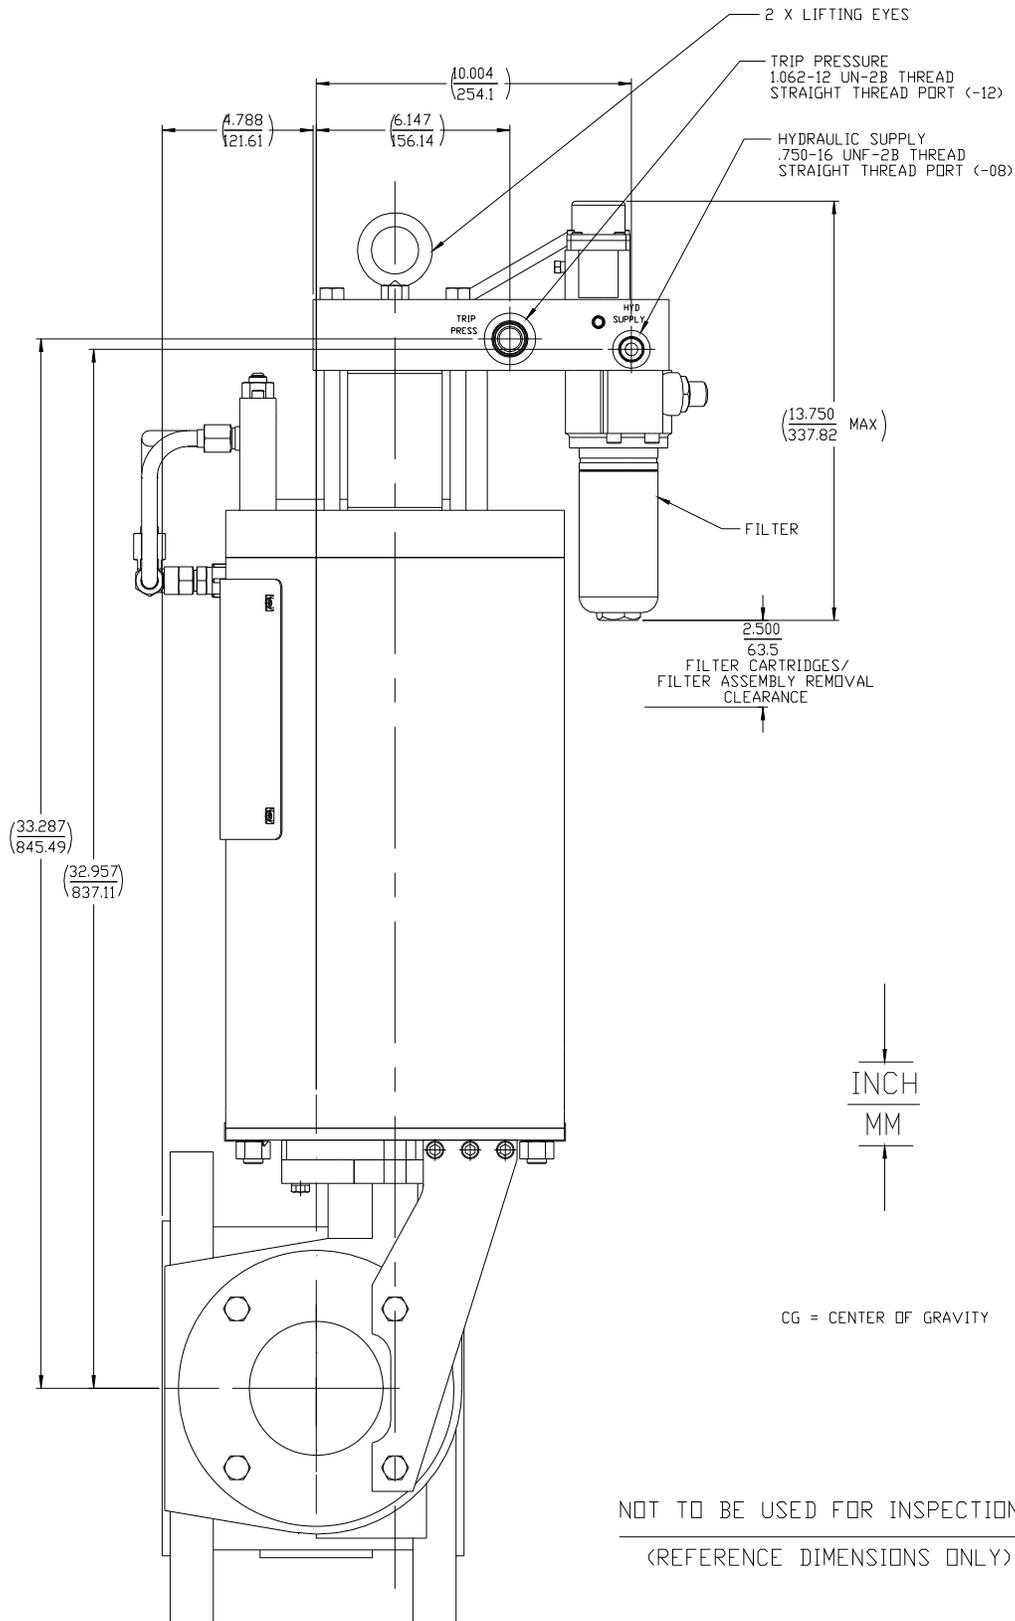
Gas Stop/Ratio Valve Outline Drawing (8-inch, with 2 LVDTs)
